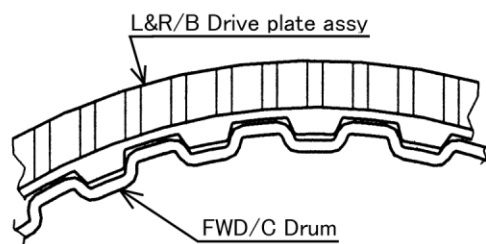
L&R/B Drive plate assy & FWD/C Drum
